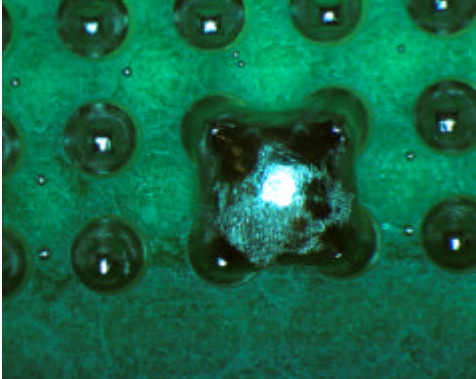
A bridge between four pins with a large number of solder balls in the soldering area.
